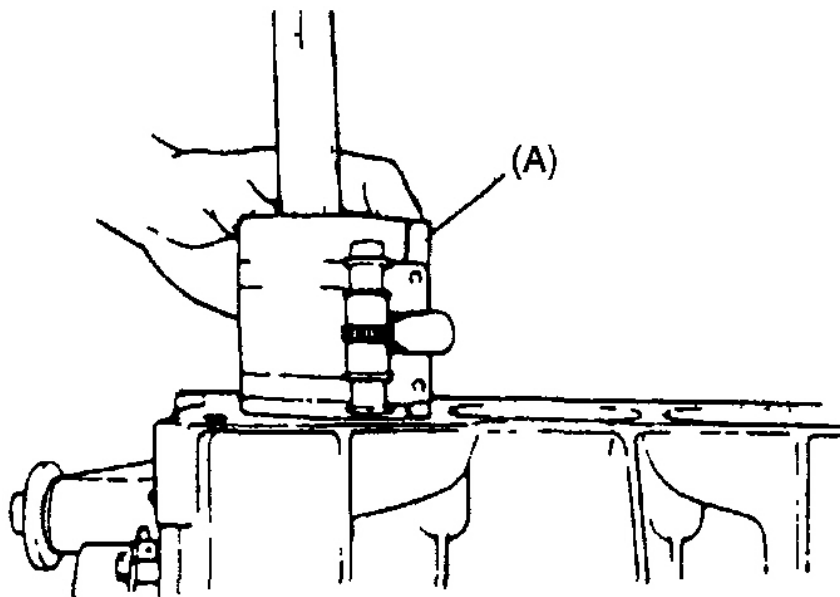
Identifying Point Mark On Piston Head To Crankshaft Pulley Side While Installing Piston And Connecting Rod Into Cylinder Bore
